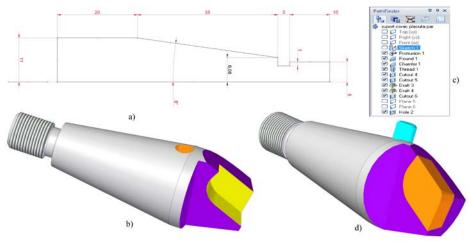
3D model of the tool reinforced with metal carbide plate and conical tail
